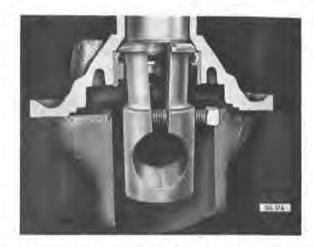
Cutaway Detail of Installed Remover and Cover in Press Set-Up
